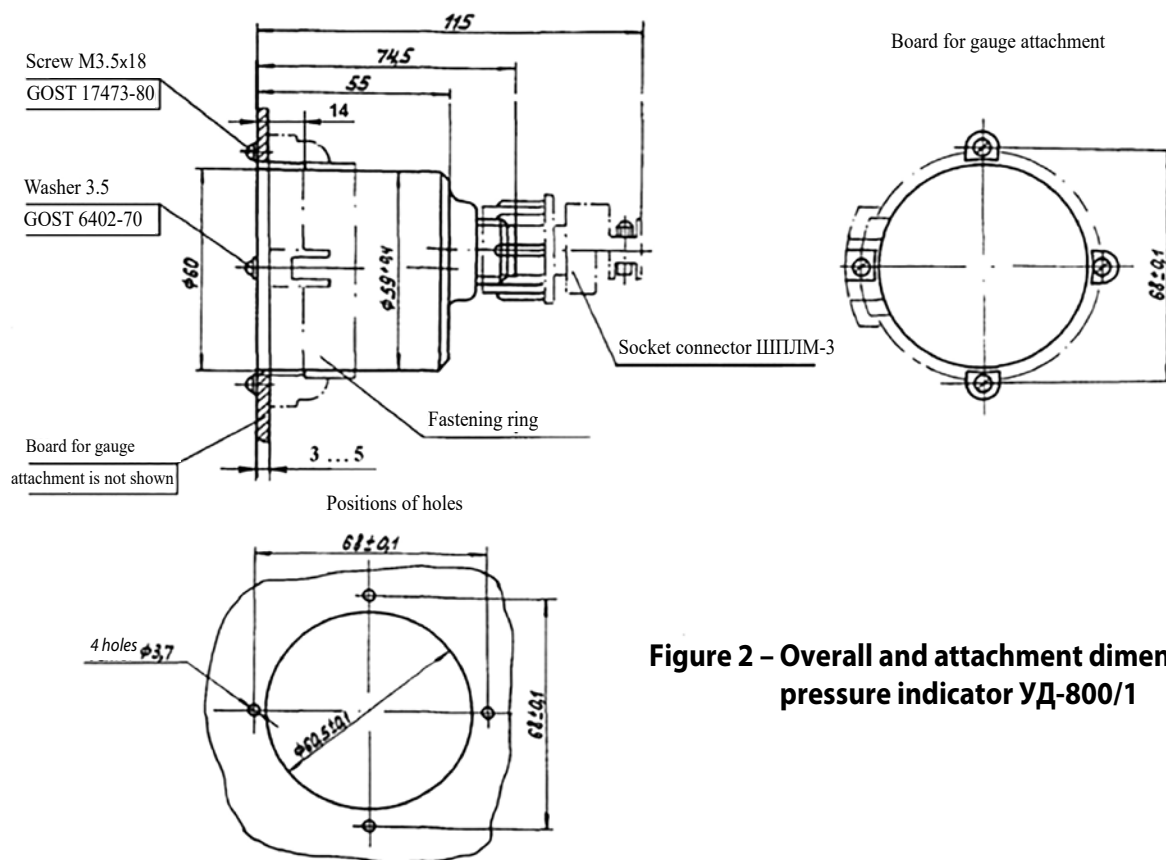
Overall and attachment dimensions of pressure indicator УД-800/1
